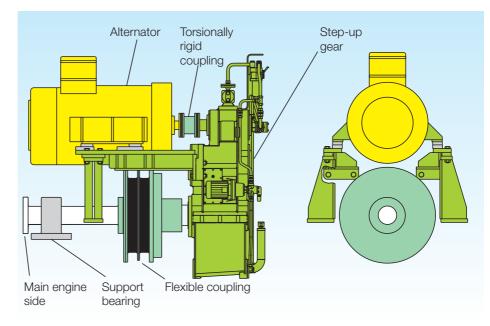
PTO BW II/GCR (A. Friedr. Flender AG)
